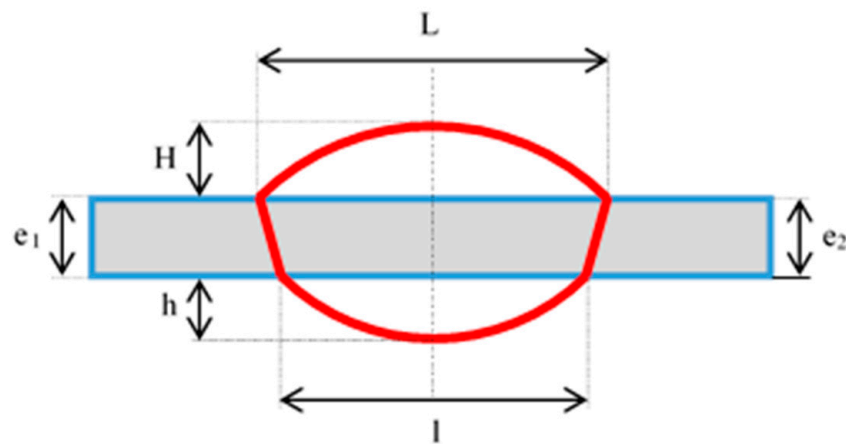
Schematic of macrographic measurements (weld seam dimensions).
